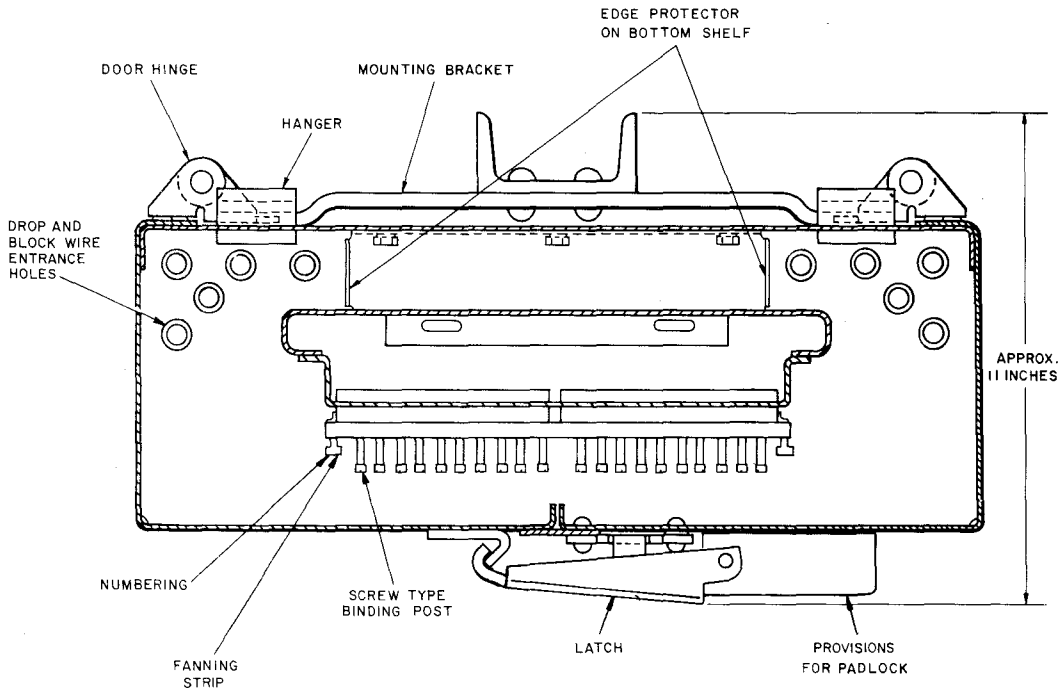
B-Type Cable Terminal (Cross Section)◀
